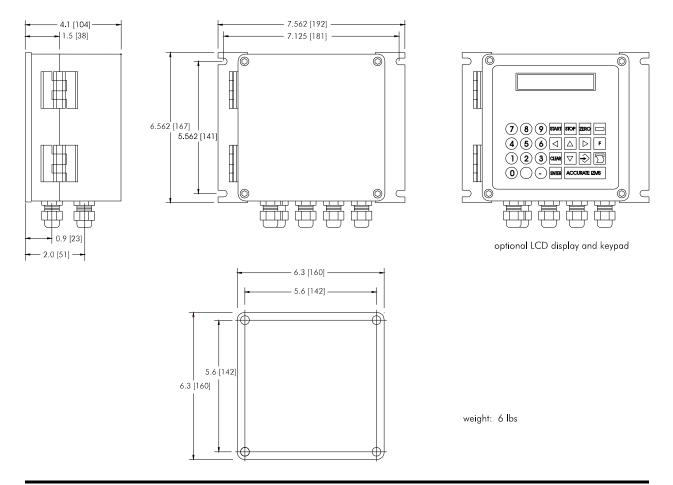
Converter Dimensions with/without Mounting Brackets
